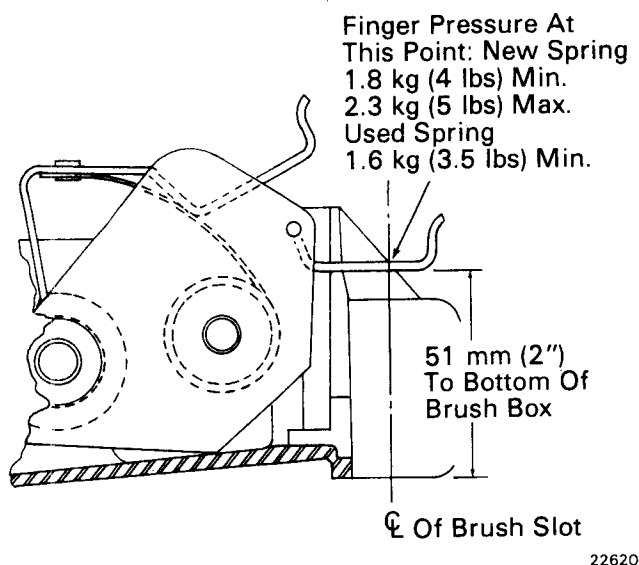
Measuring Constant Pressure Spring Type Brush Finger Pressure (Spring Cell In Place)
